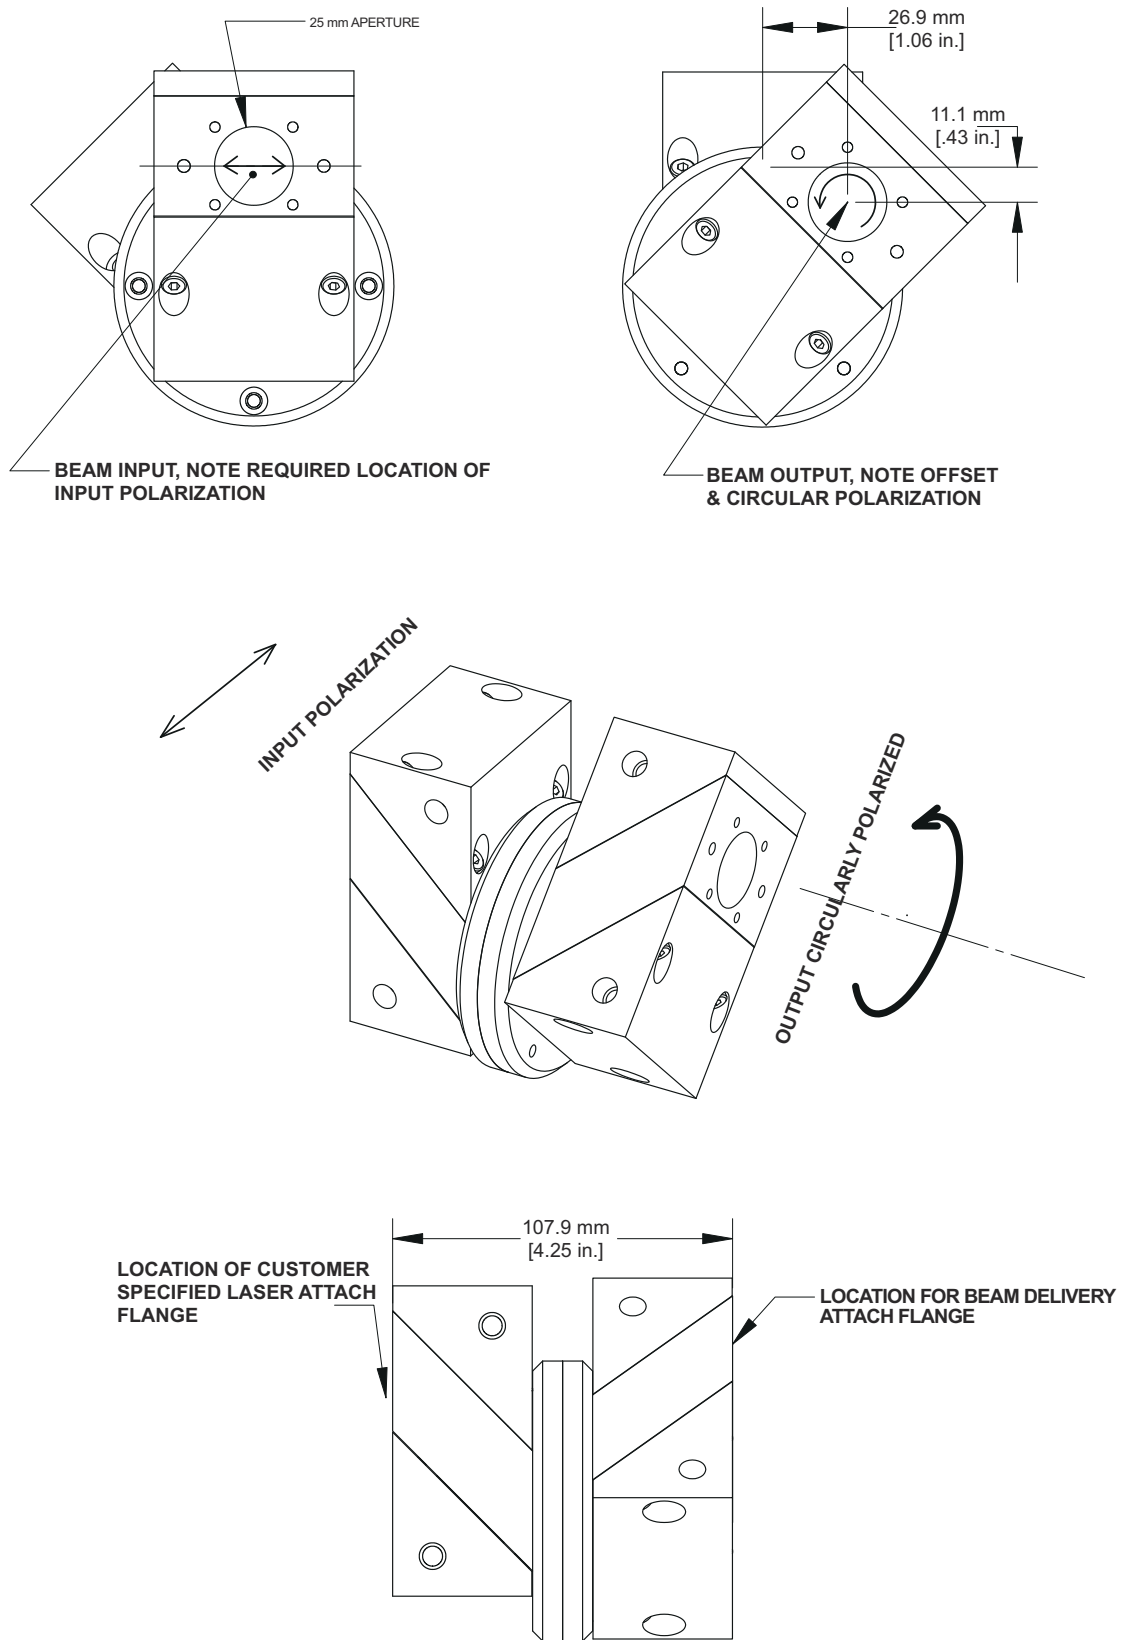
BQE-25 General Illustration (Mounting Flange Not Shown)
